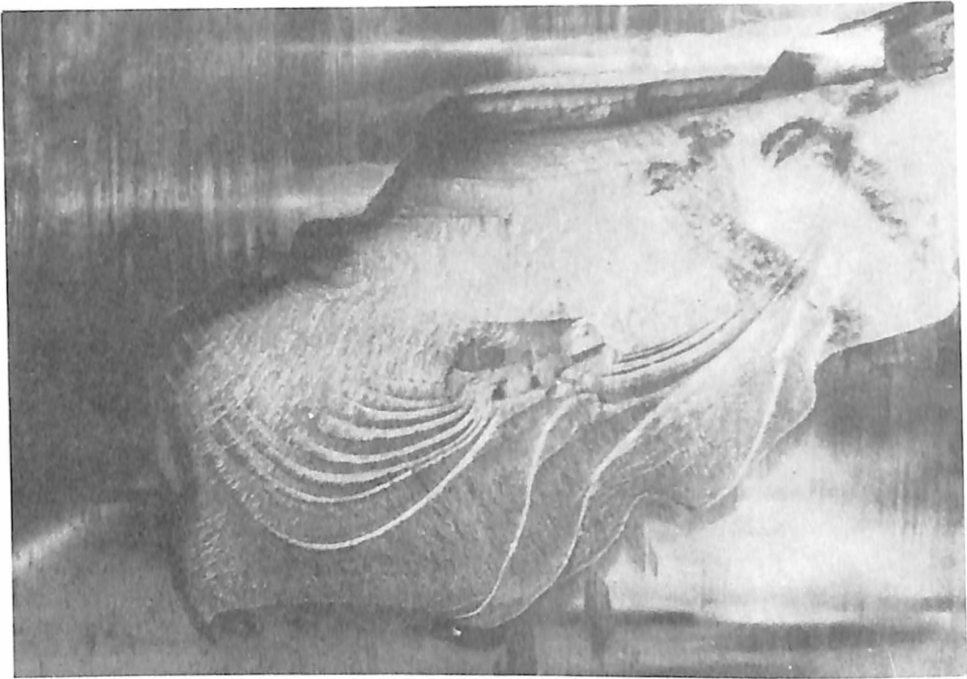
Closer view of spalled surface revealing origin of spalling and propagation of beach marks
